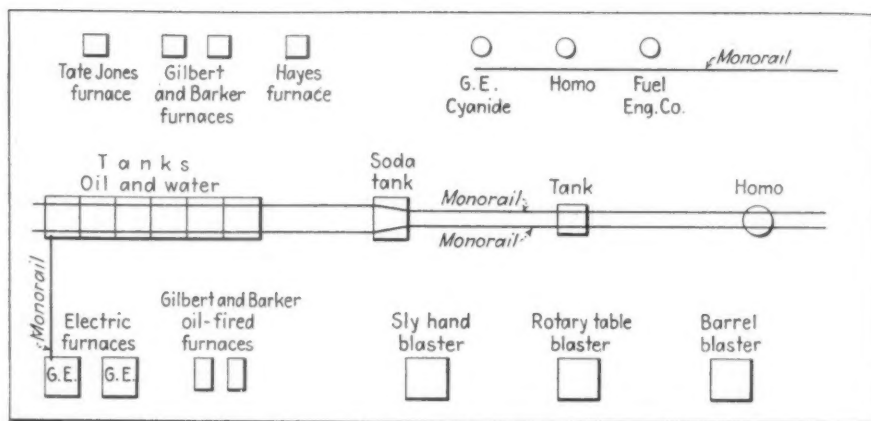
Layout of heat treating equipment for small parts, and of sand blasting equipment.
